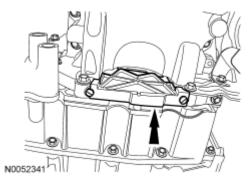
Identifying PTU & Bolts Courtesy of FORD MOTOR CO.
